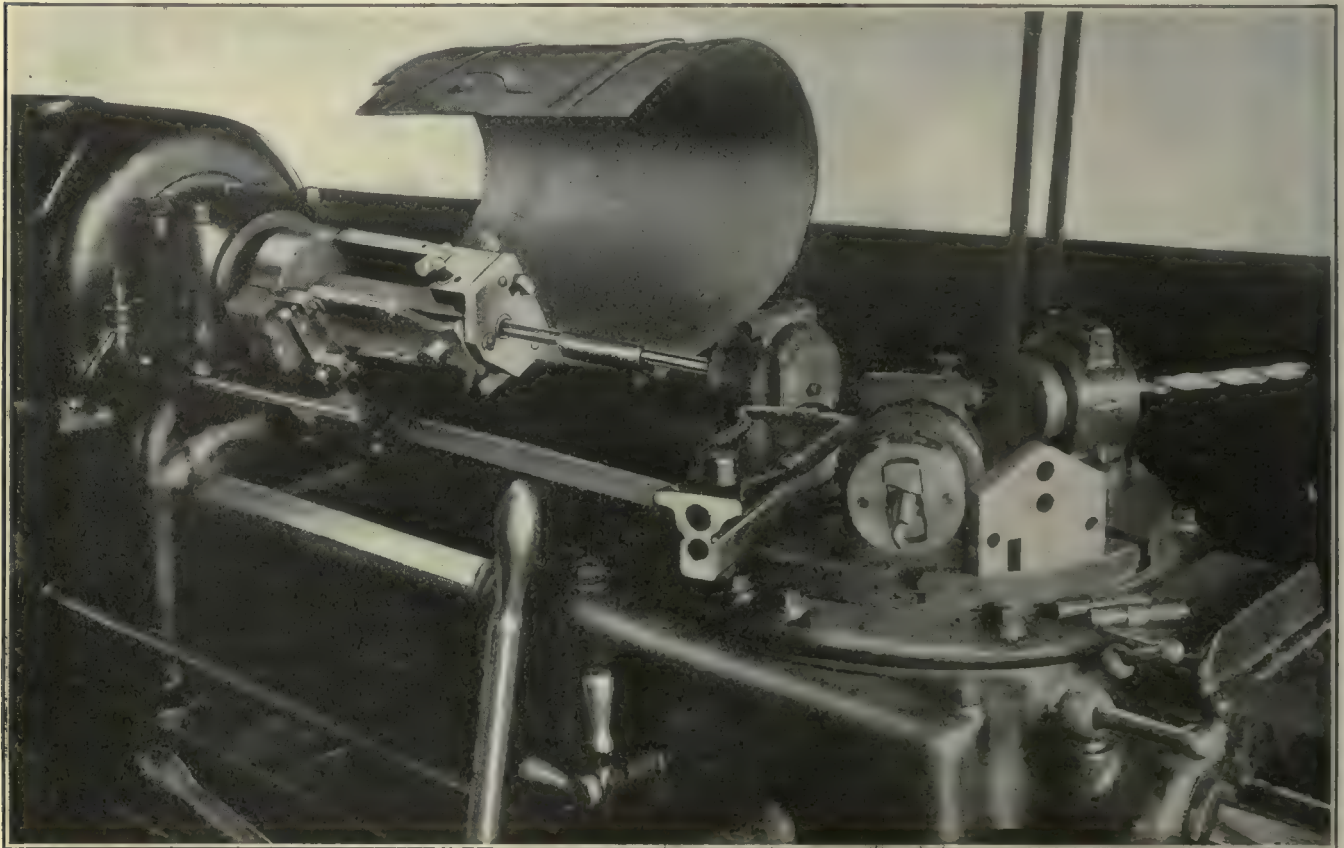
DRILLING AND REAMING THE SMALL HOLE IN THE TURRET LATHE
